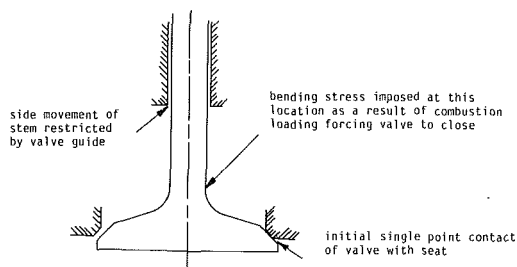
Bending stress imposed at the junction of the head and fillet surfaces
